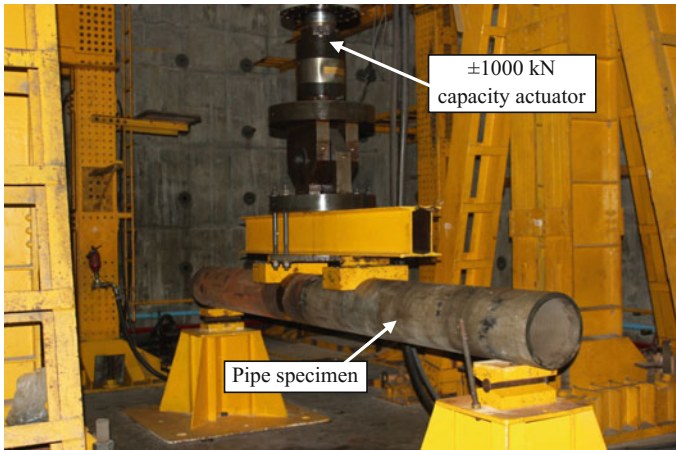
A view of fatigue pre-cracking of a bi-metallic pipe weld joint
